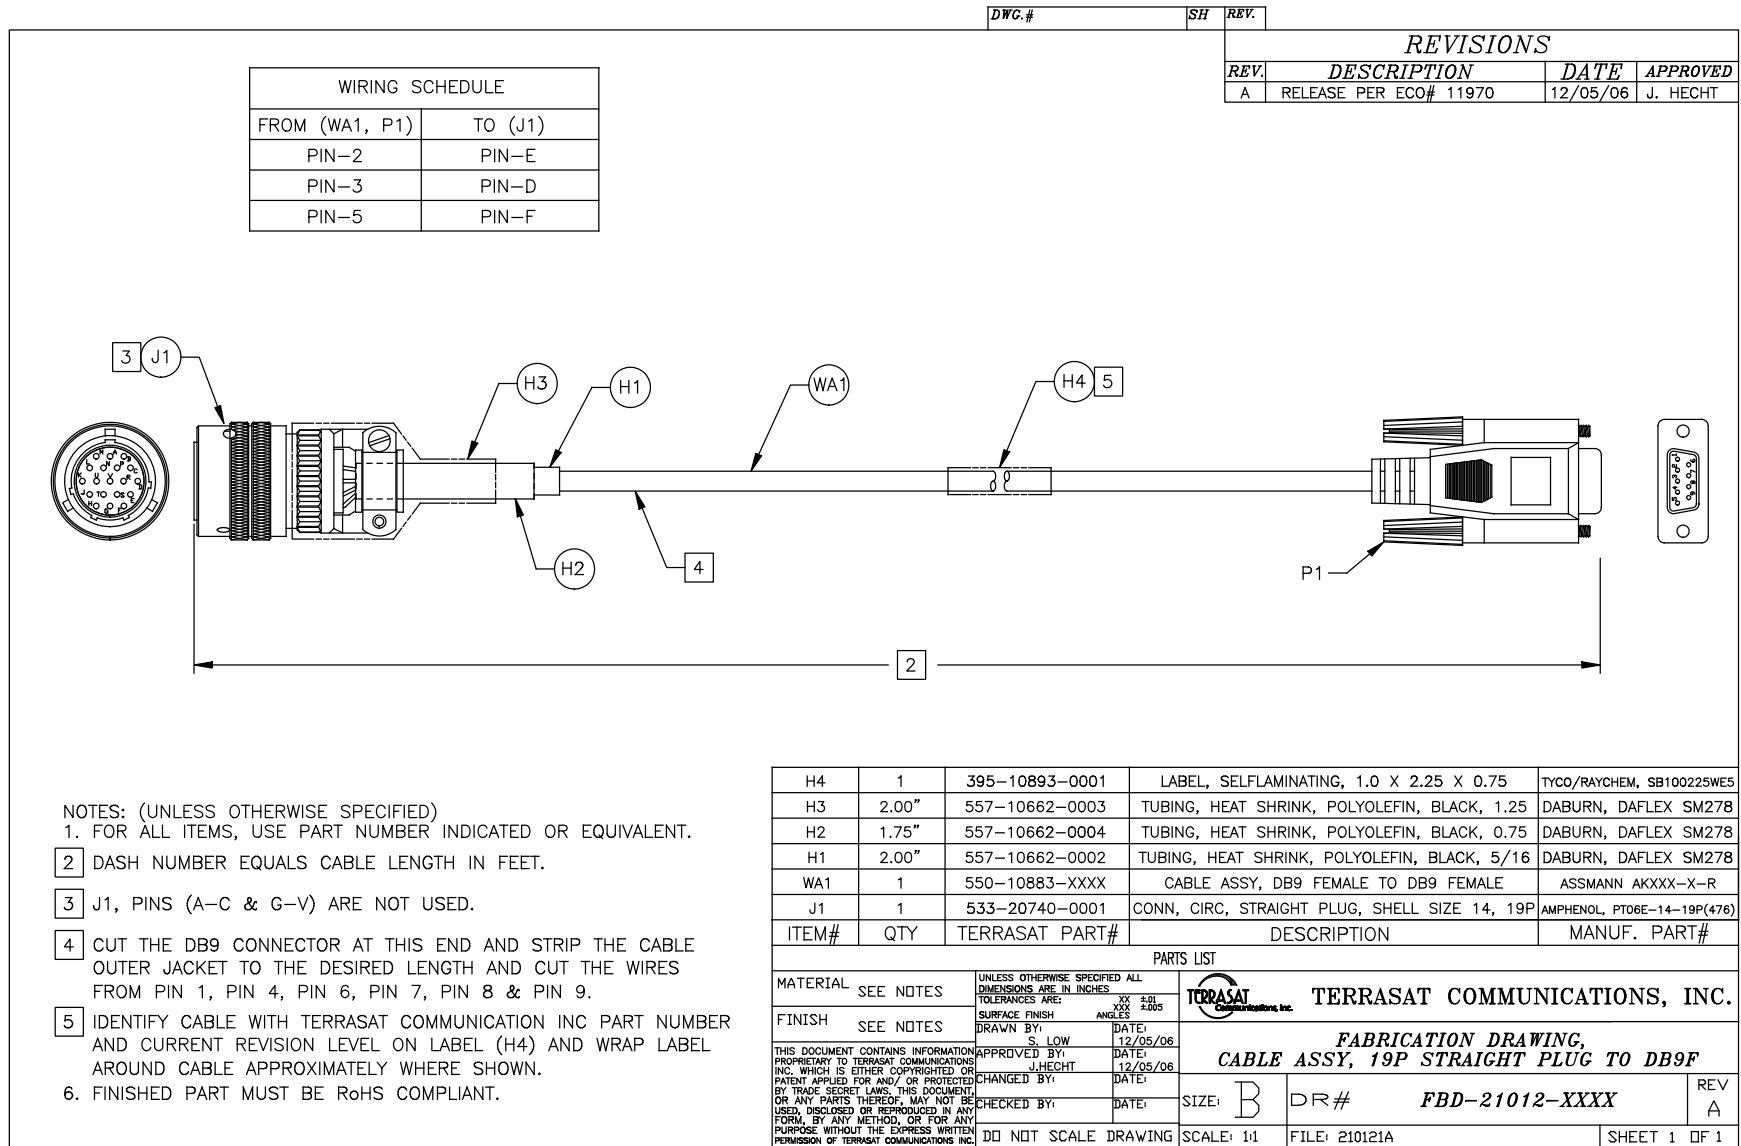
Fabrication Drawing, FBD-21012-XXXX, Rev A
